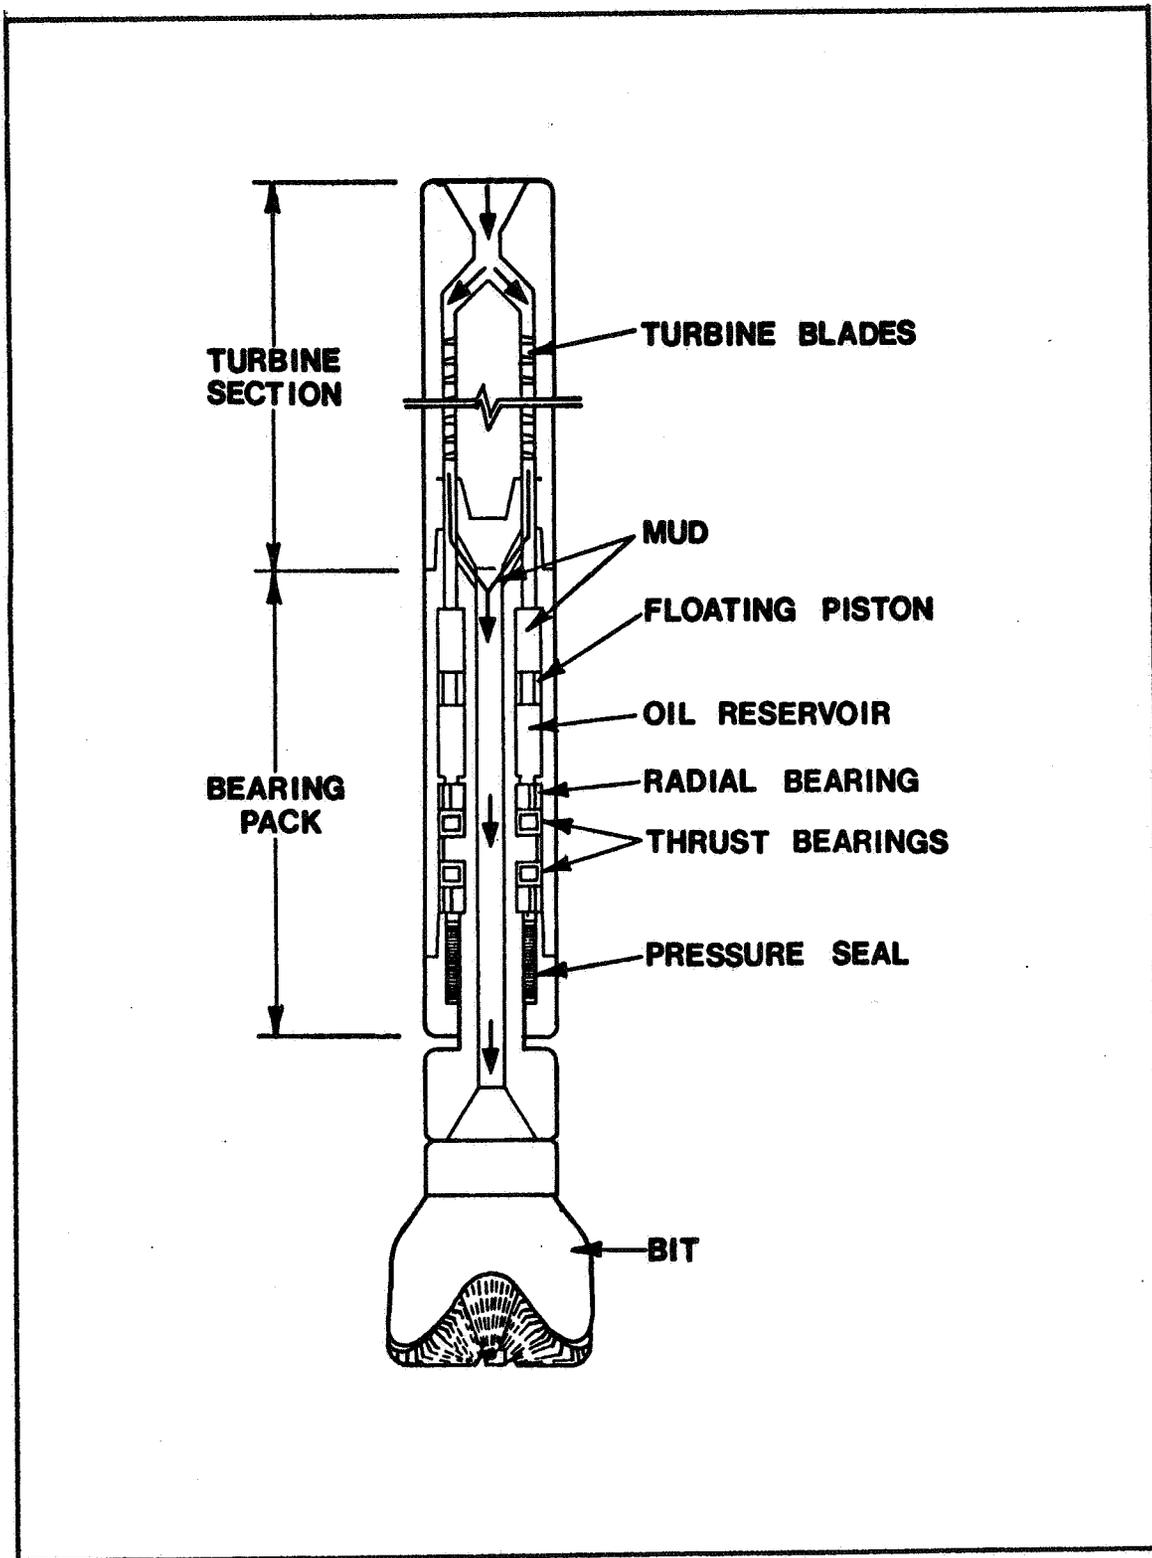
Turbodrill Schematic - Sealed Bearing Pack.
